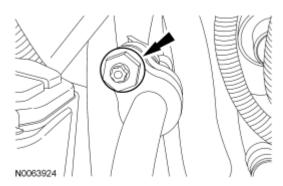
Locating A/C Pressure Tube Fitting Nut Courtesy of FORD MOTOR CO.
